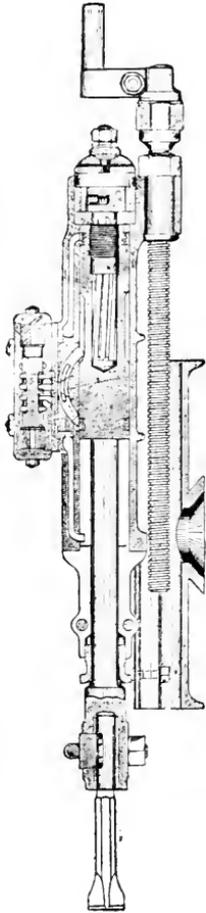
THE INGERSOLL-SERGEANT AUXILIARY VALVE DRILL.
